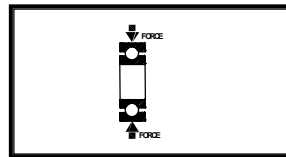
Pre-loading on the bearings is one of the leading causes of premature bearing failure
